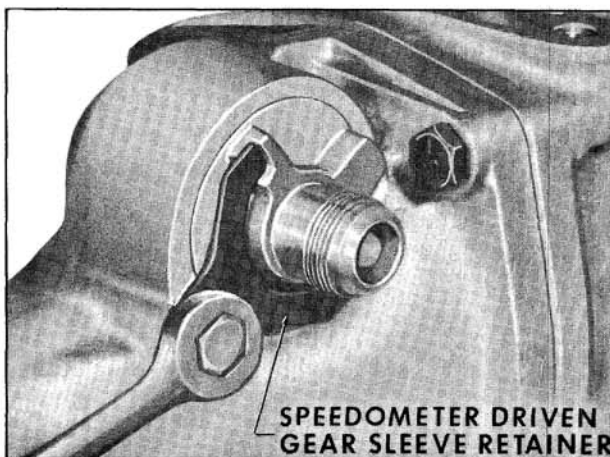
Installing Speedometer Driven Gear Retainer
